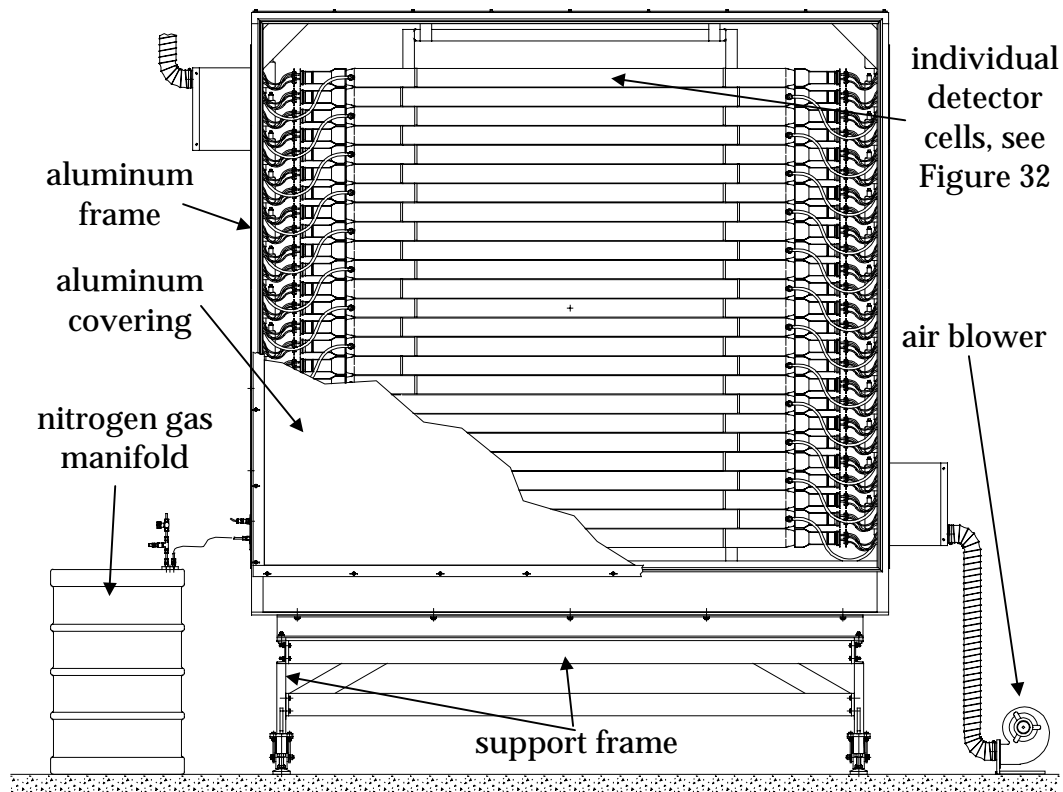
A mechanical cutaway drawing of one of the *Neutron Wall Array*.
